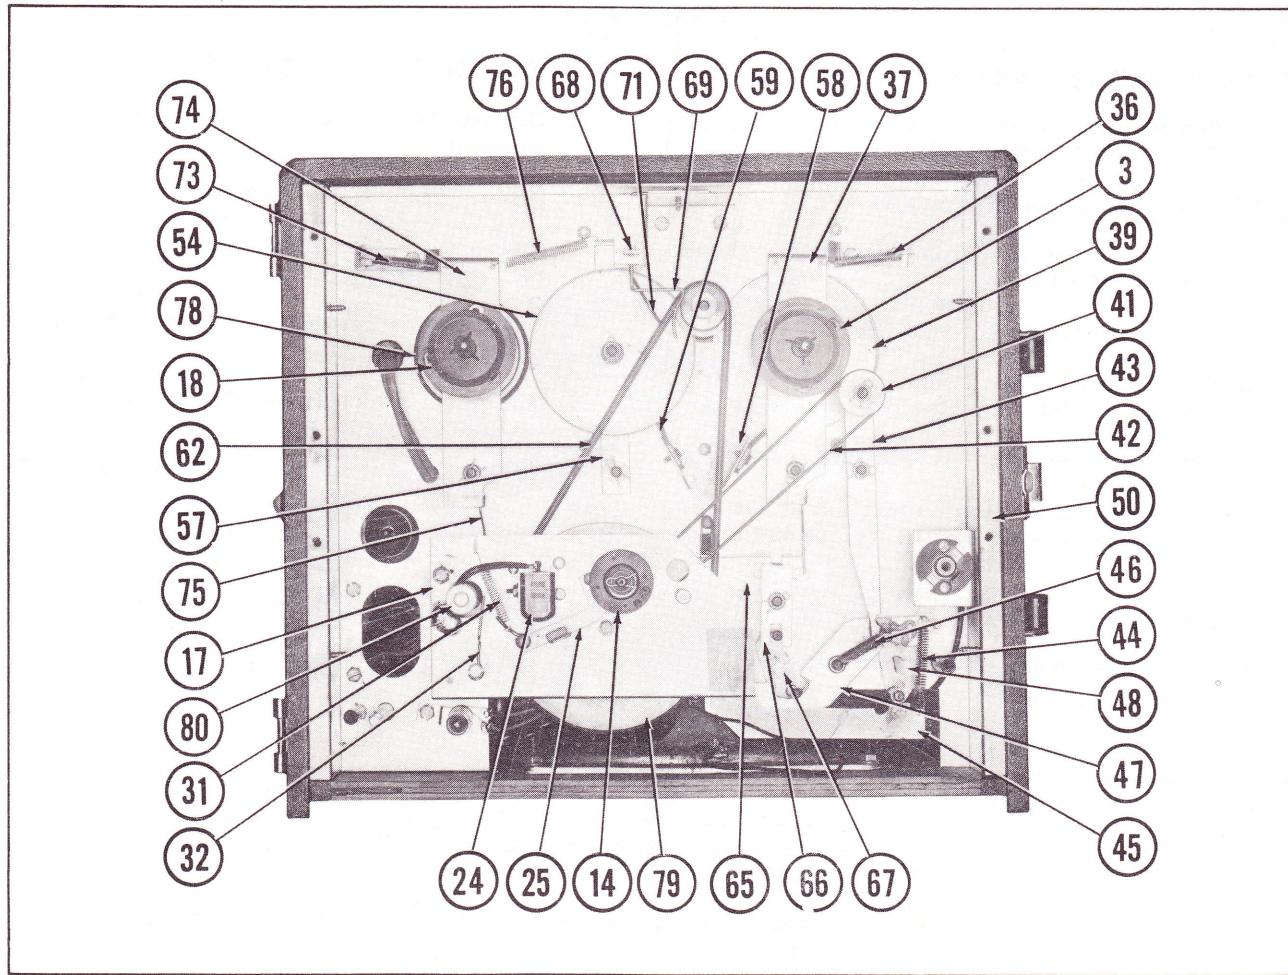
TOP VIEW OF MECHANISM WITH DRESS PLATE REMOVED
